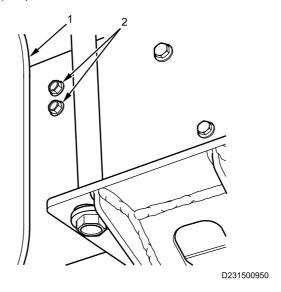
Left Harness Support Bracket Frame Brace Bolts.
